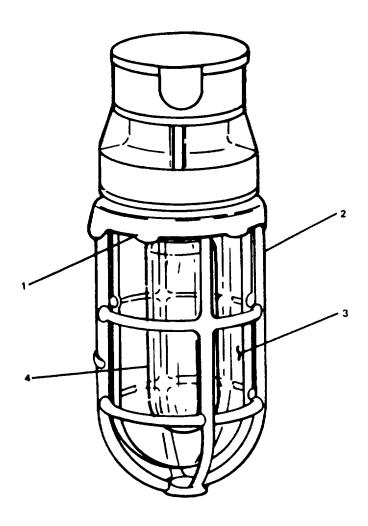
Repair Explosion Proof Lighting Fixture.
